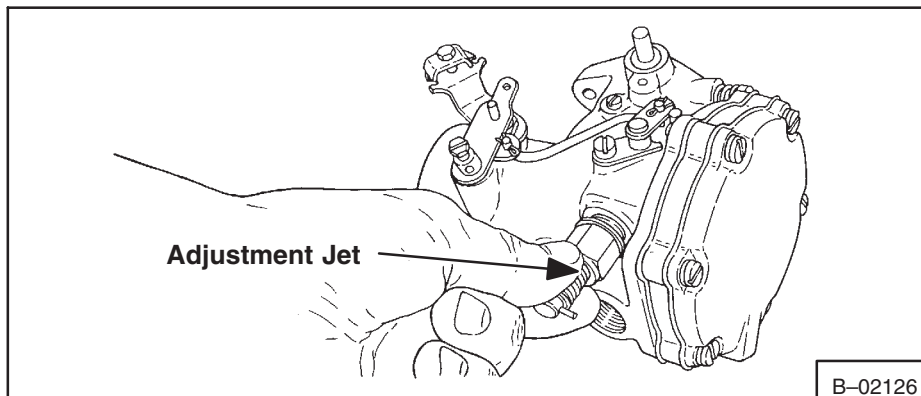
A-10 Removing Adjustment Jet & Idler Adjustment Screw
